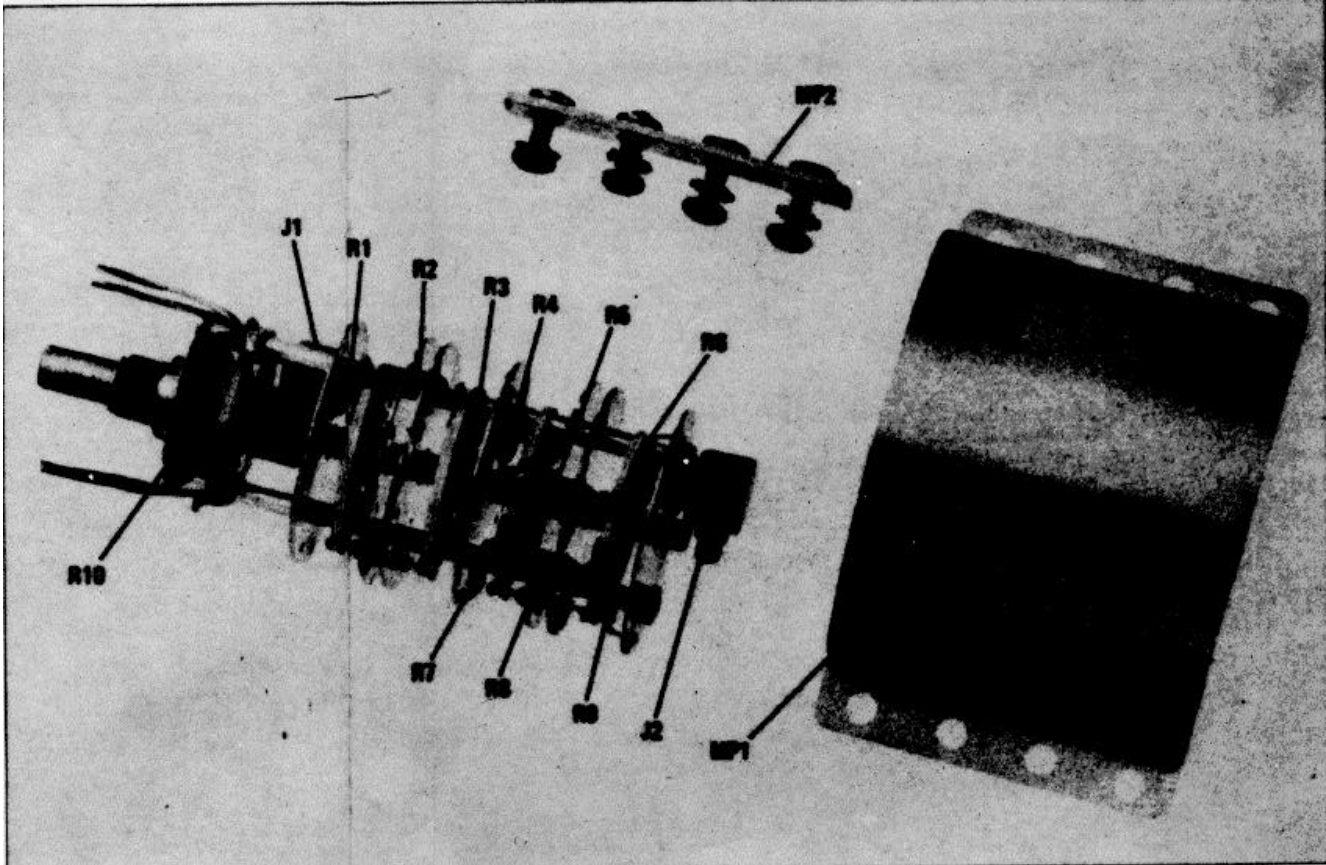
Input Attenuation Assembly A3 (08553-6021)
